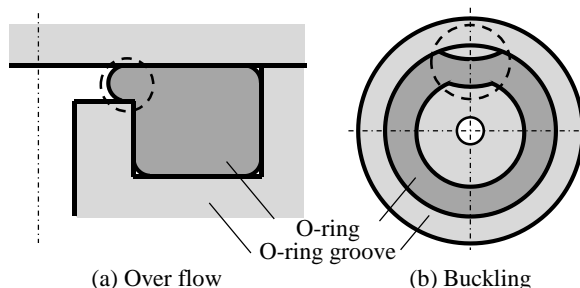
Fracture mechanism of O-ring by volume expansion. (Reprinted from [2])
